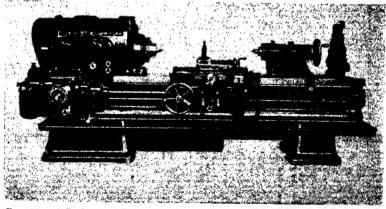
A Lodge and Shipley 22-in, engine lathe made by one of the oldest builders.
